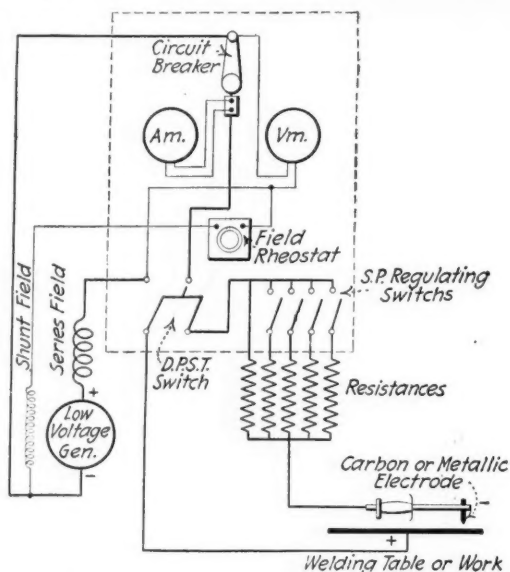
DIAGRAM OF CONNECTIONS FOR ELECTRIC WELDING
